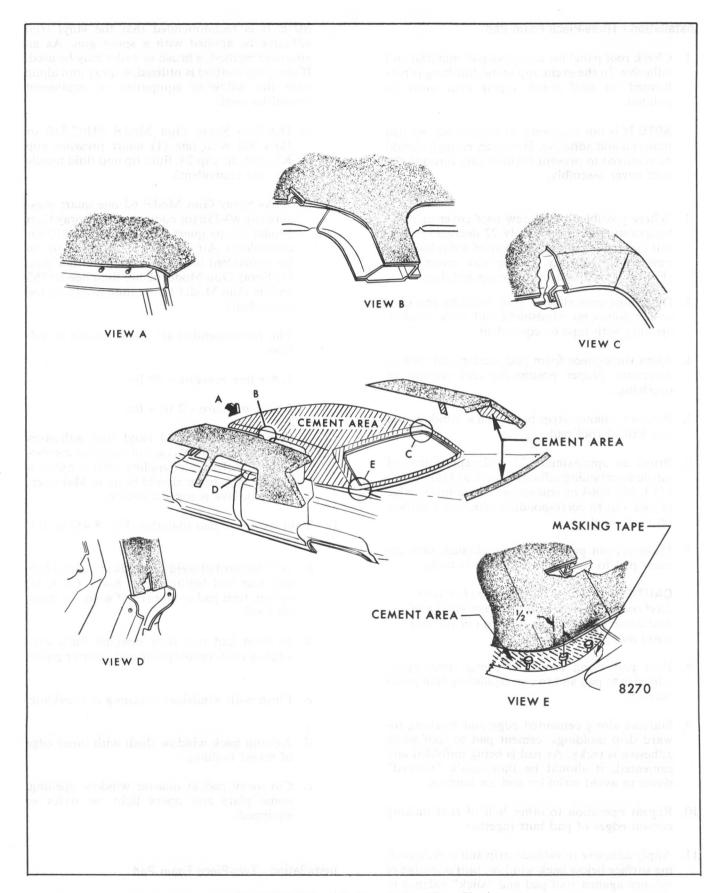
Full Foam Pad Installation (Three Piece)
